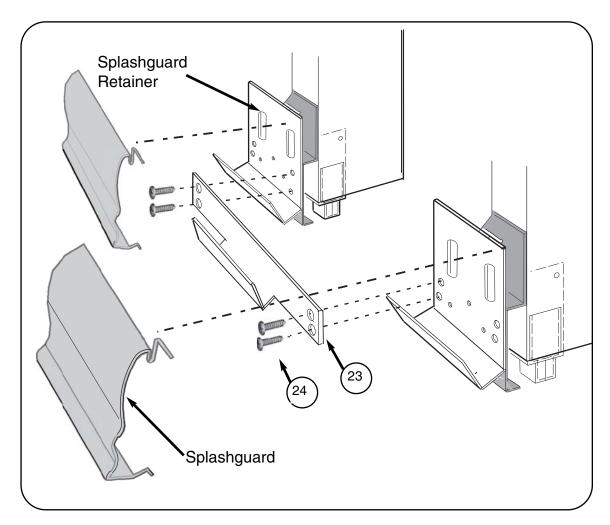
Installing the Splashguard Joining Bracket and Splashguard
